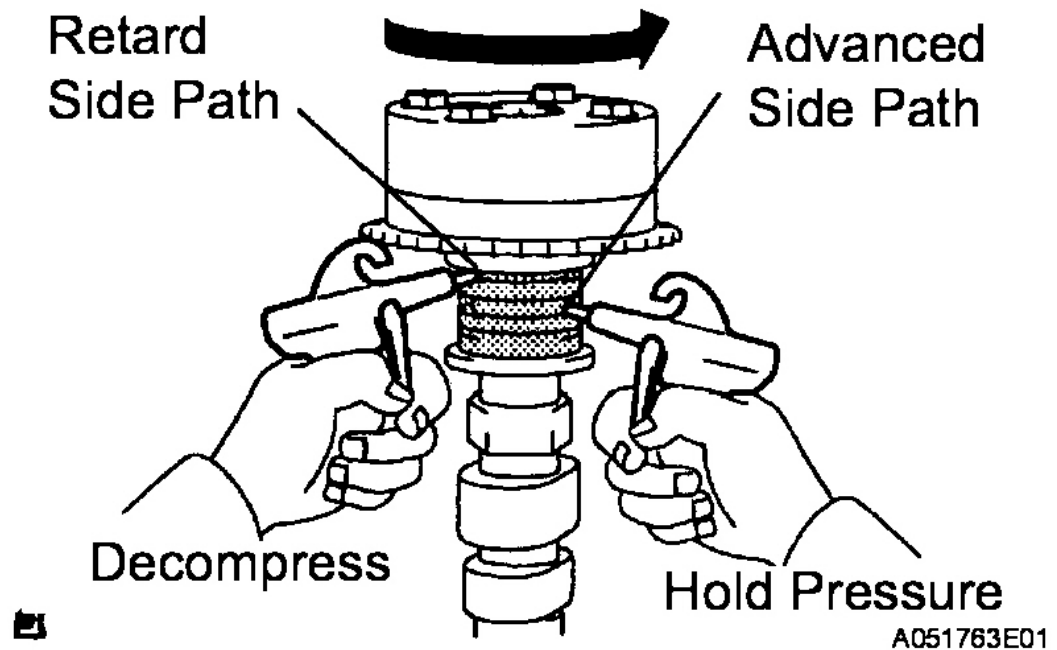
Confirming Camshaft Timing Gear Revolves While Reducing Air Pressure Of Timing Retard Path
